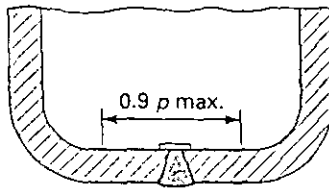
BOX TYPE HEADER JOINT
